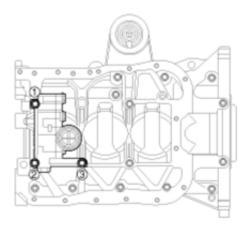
Identifying Oil Pump Tensioner & Bolt (2.0 Non-BSM) Courtesy of KIA MOTORS AMERICA, INC.
